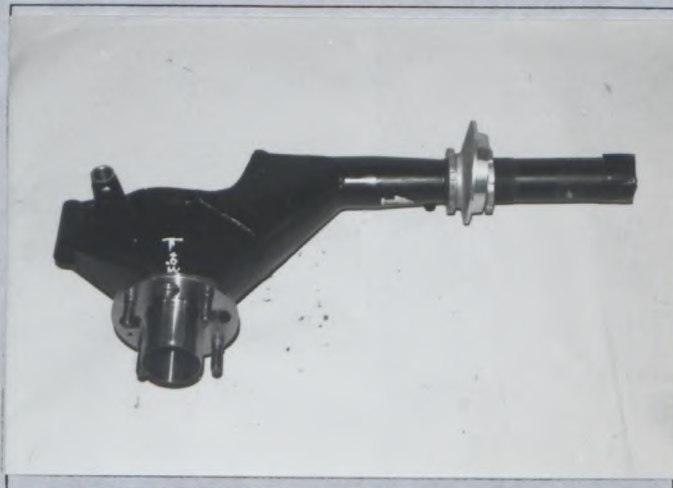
REINFORCED TRACK CONTROL ARM, TYPE A
